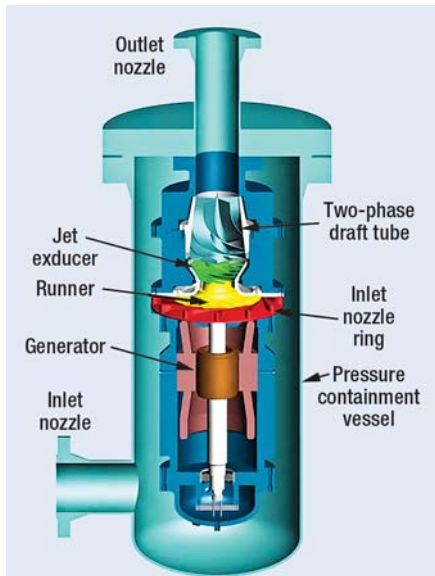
Cross-section of a two-phase expander assembly inside a pressurized containment vessel.
